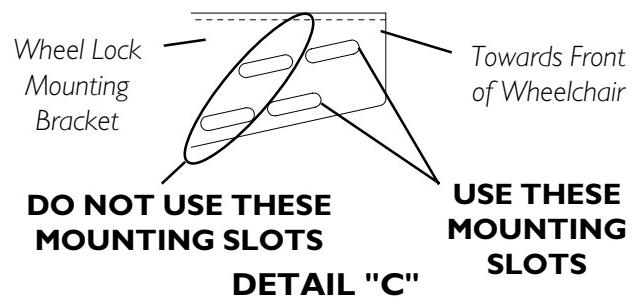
INSTALLING WHEEL LOCKS FOR MOTOR/GEARBOX ASSEMBLIES
